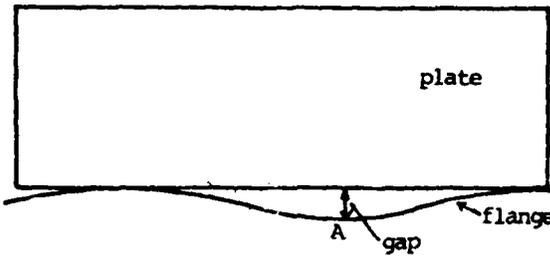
GAP FORMATION IN A FILLET WELD
